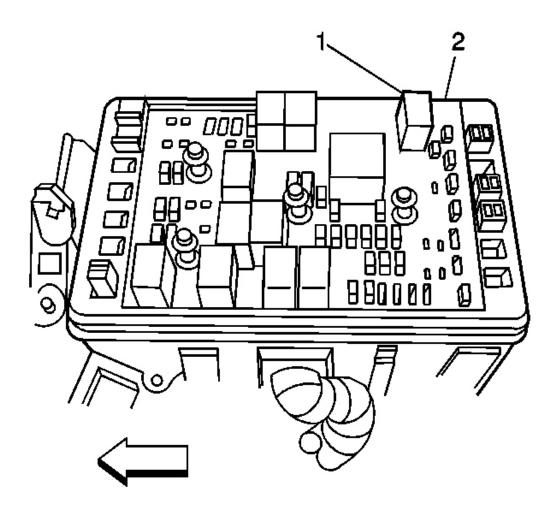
Locating Cooling Fan Relay Courtesy of GENERAL MOTORS CORP.
